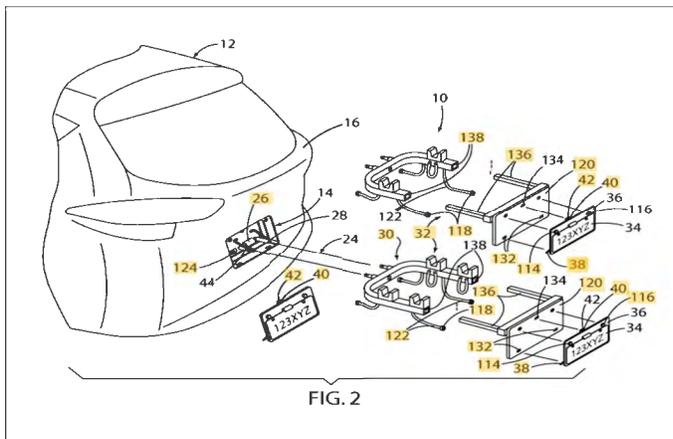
exploded perspective view of a vehicle bike rack according to the present invention
